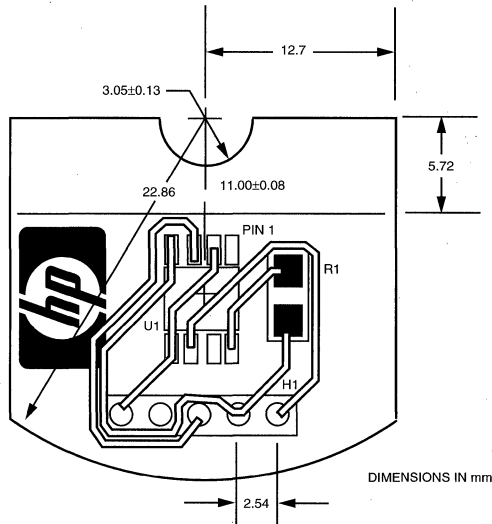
Example of a pc board layout for an HEDR-8000 and a resistor.
